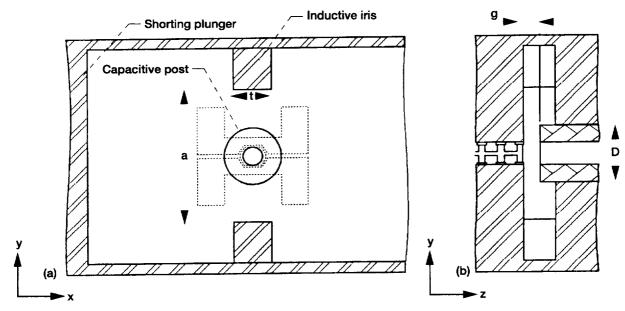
TunneLadder coupler design. (a) Cross-sectional view. (b) Top view.
